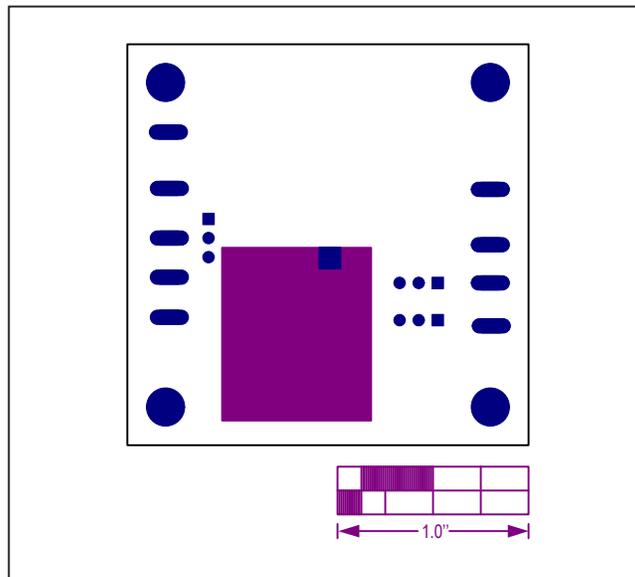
MAX17545 5V Output EV Kit Component Placement Guide—Bottom Solder Mask
